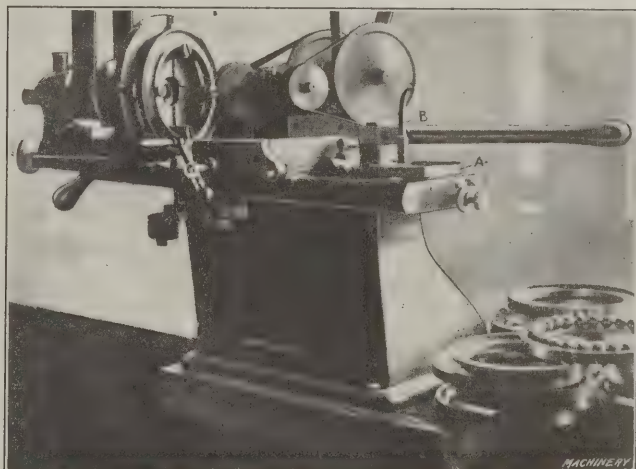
Grinding Ball-races. Photograph taken at the Becker Milling Machine Co.'s Shops, Hyde Park, Mass.
